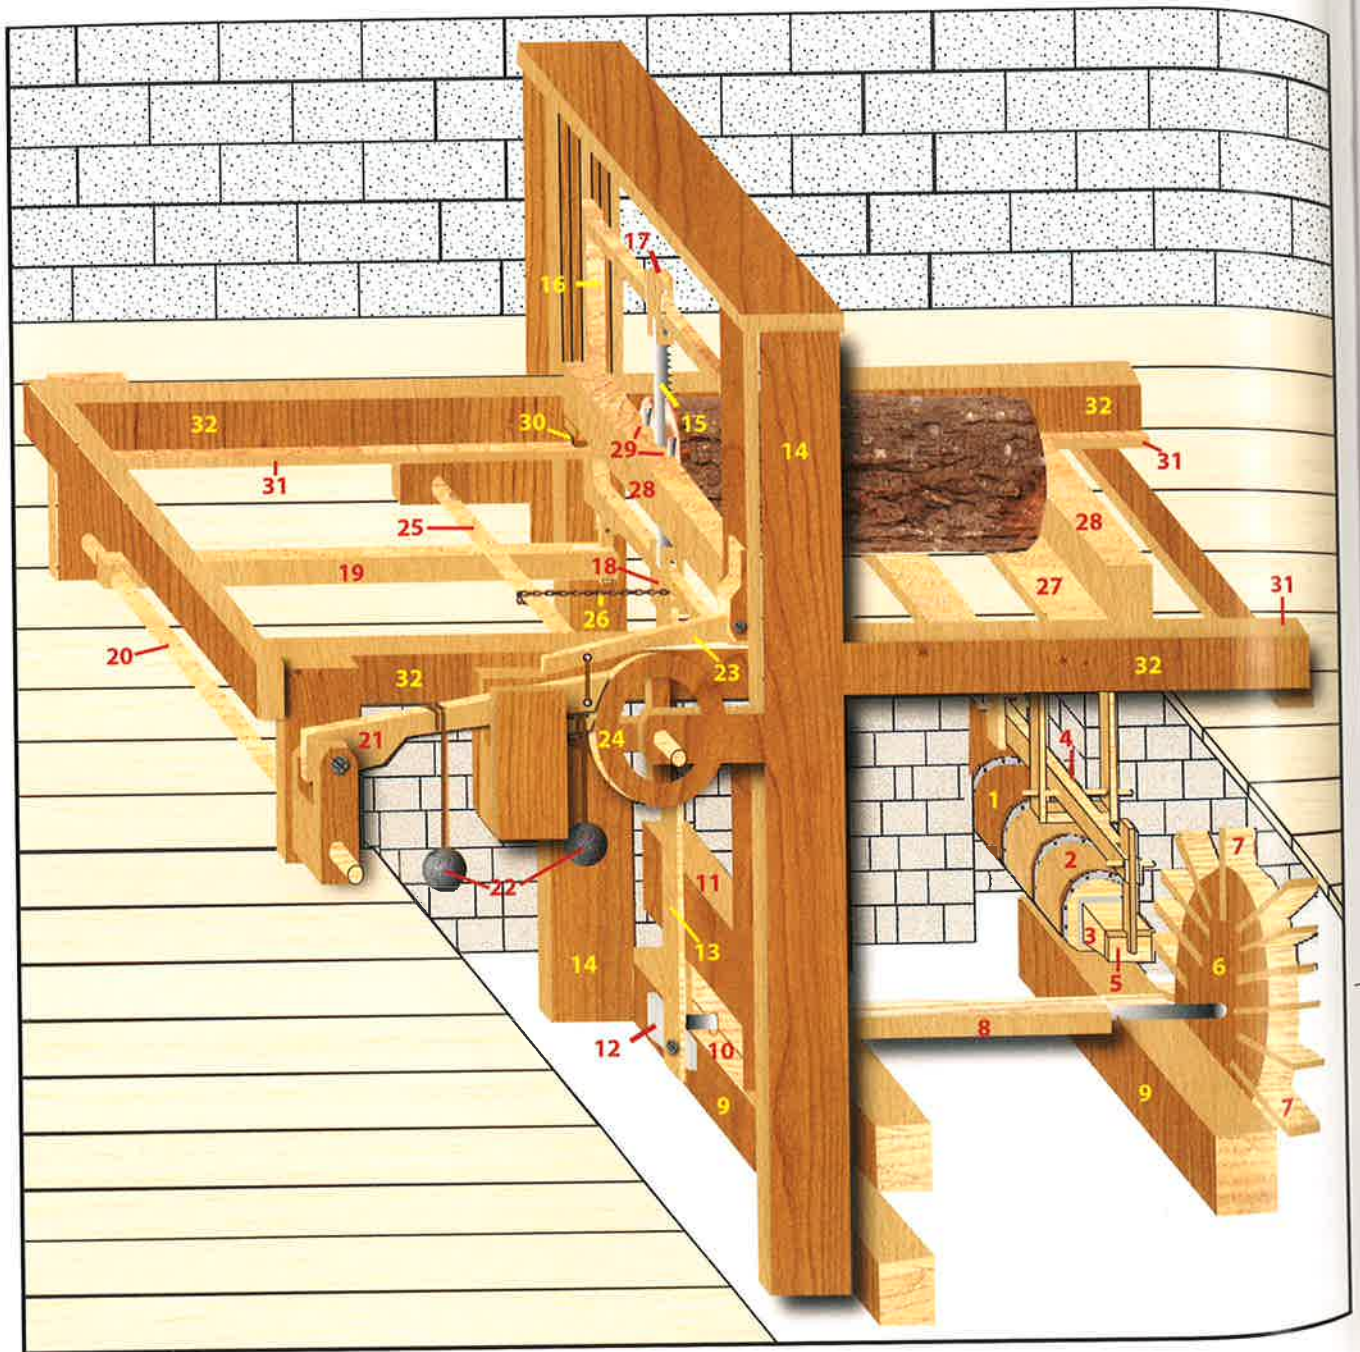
Industrial water sawmill mechanism, drawing by F. Dasoulas.
